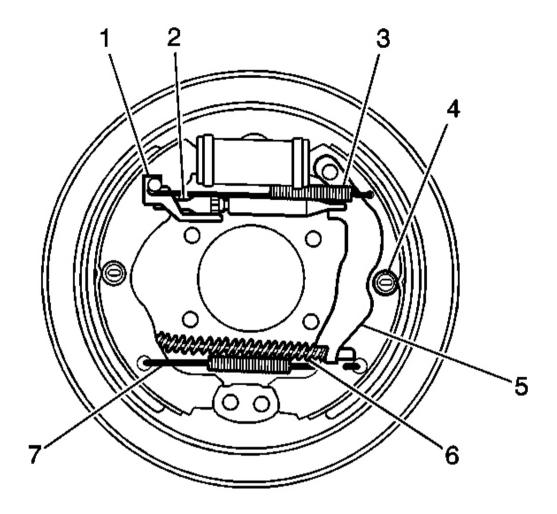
View Of Brake Components Courtesy of GENERAL MOTORS CORP.
